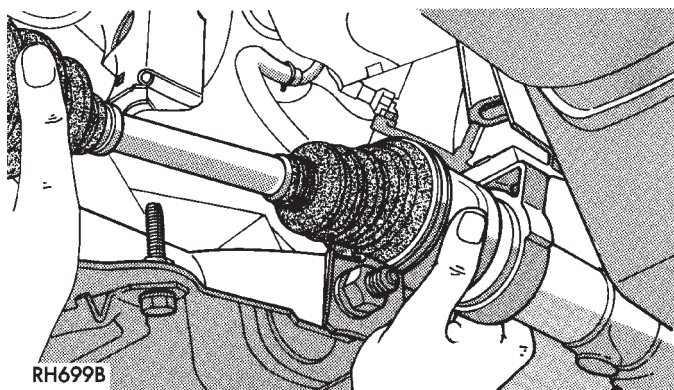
Removing Driveshaft Assembly Unequal Length
